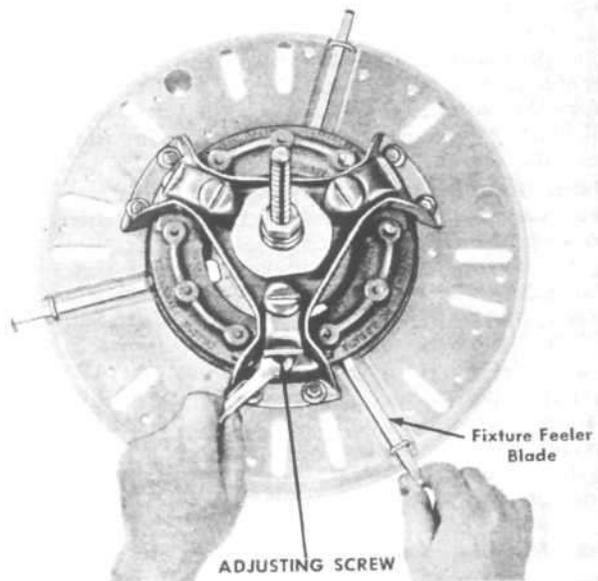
ADJUSTING LEVERS ON AUBURN CLUTCH
